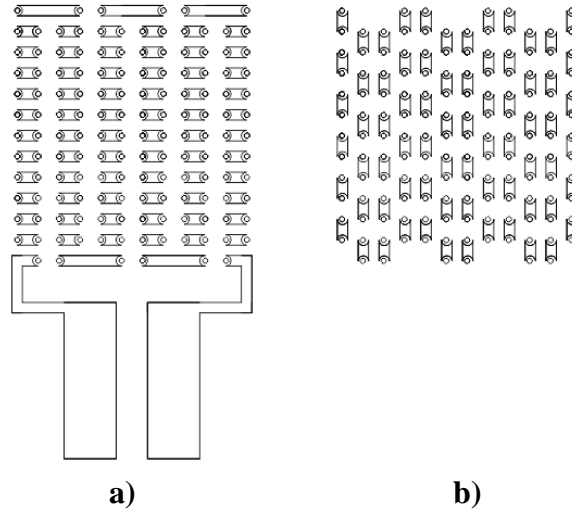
Picture of the copper trace designs and laser drilled via holes for both the a) top and b) bottom surfaces of the PHFS.
